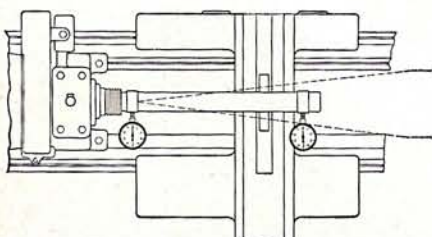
Testing Alignment of Headstock Spindle in the Horizontal Plane with Dial Indicator.
